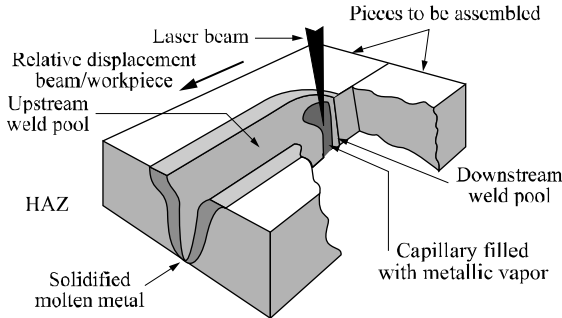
Cross and longitudinal section of a weld bead
